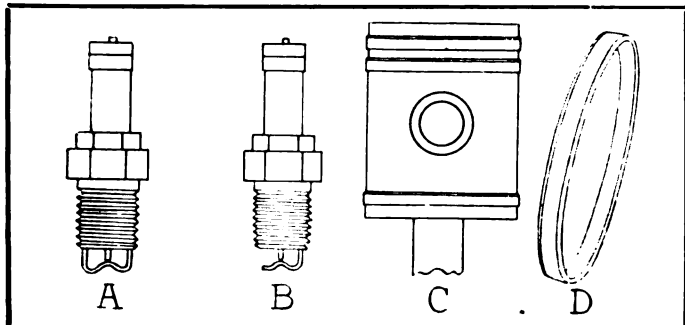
A, Centre of Shell Electrode Bent to Prevent Sooting; B, Electrode Cut Away to Insure Against Fouling; C, Piston Ring Adapted to Prevent Excess Oil Being Carried to Combustion Chamber.
